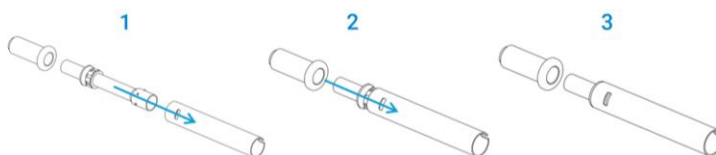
Illustrated view showing the reassembly of the ceramic outer tube-set
